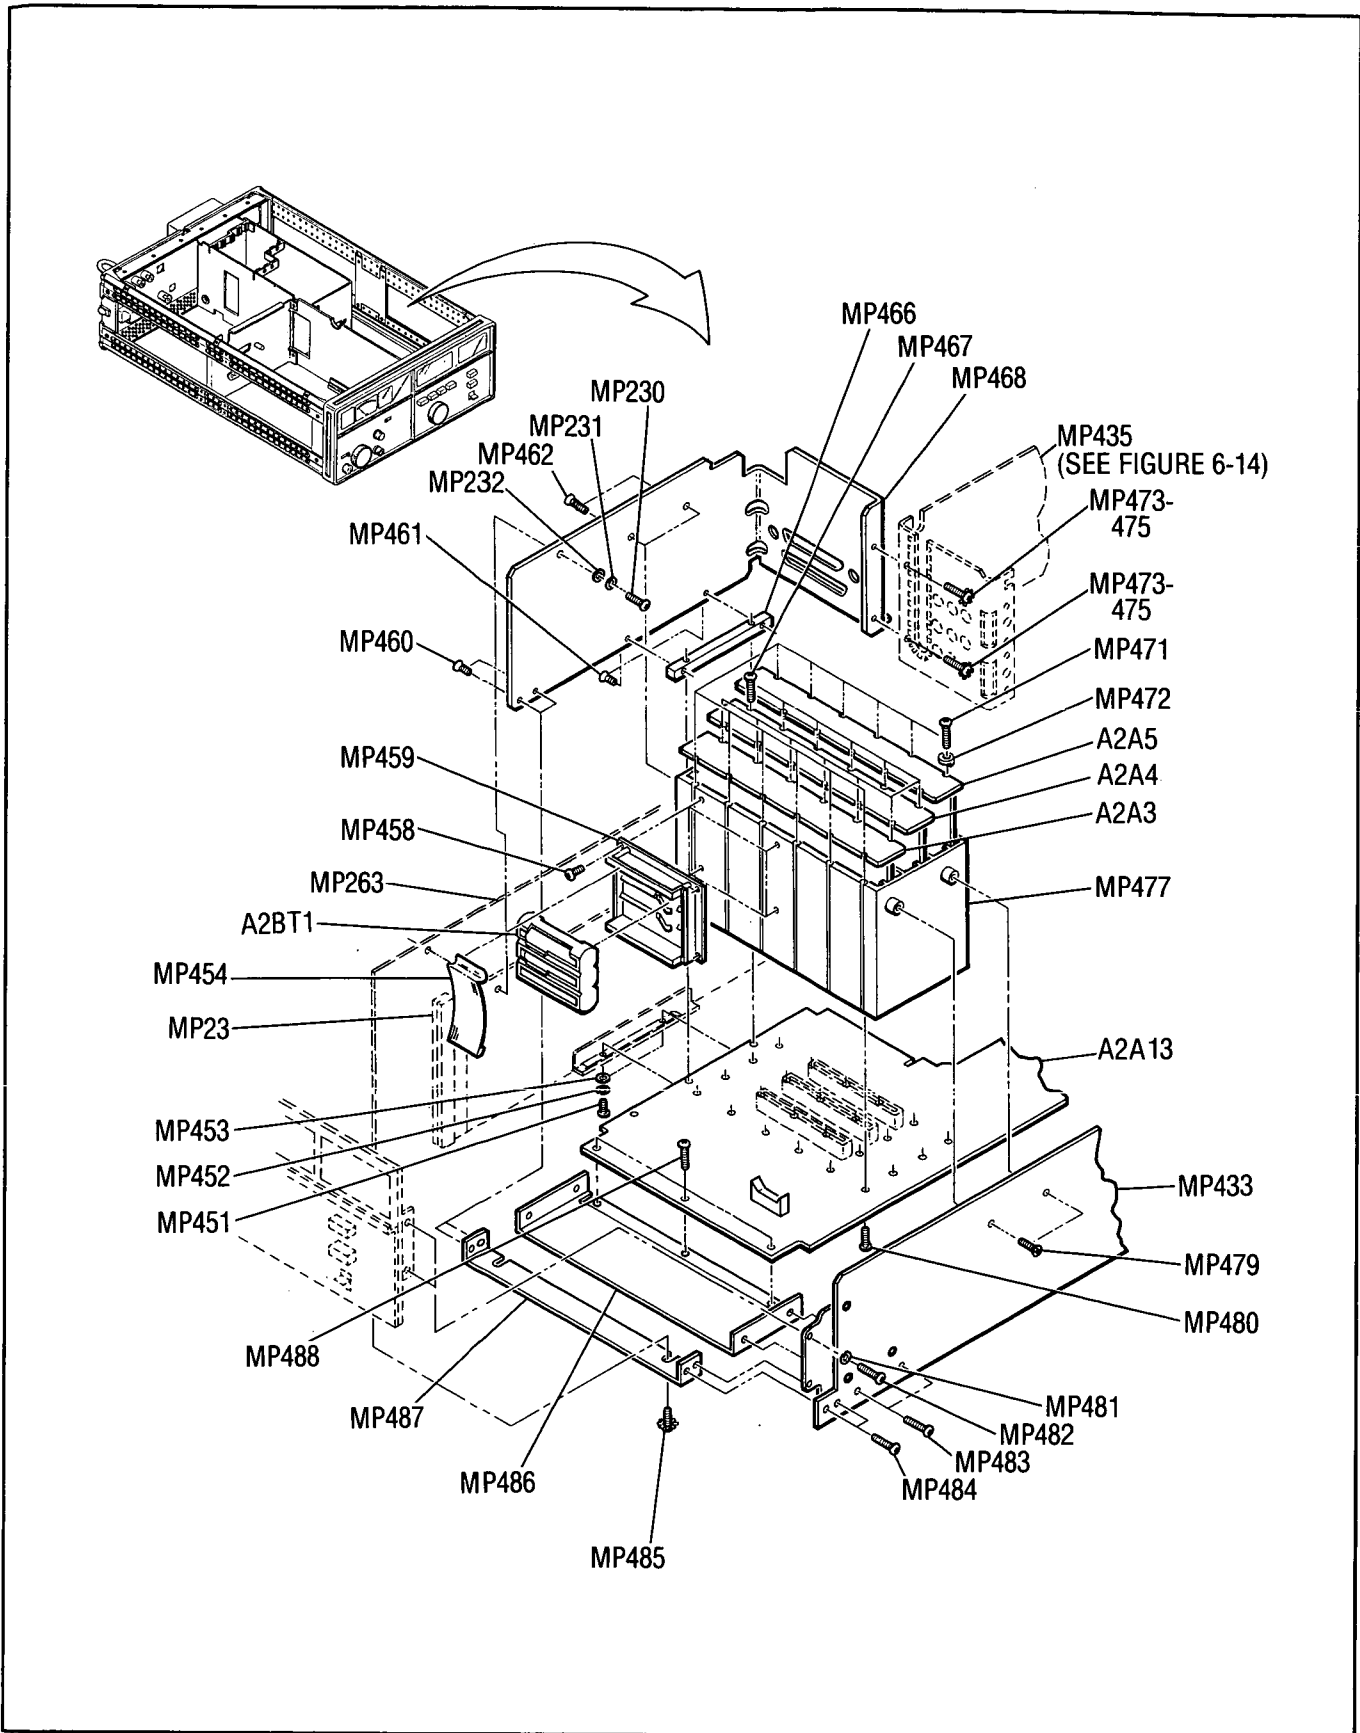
P/O A2 Controller Assembly Illustrated Parts Breakdown
